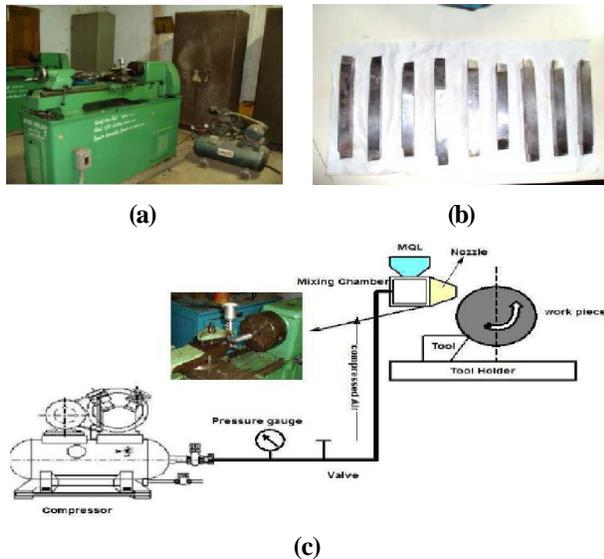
(a) Photographic view of the experimental set-up (b) HSS cutting tool (c) Schematic view of MQL system
